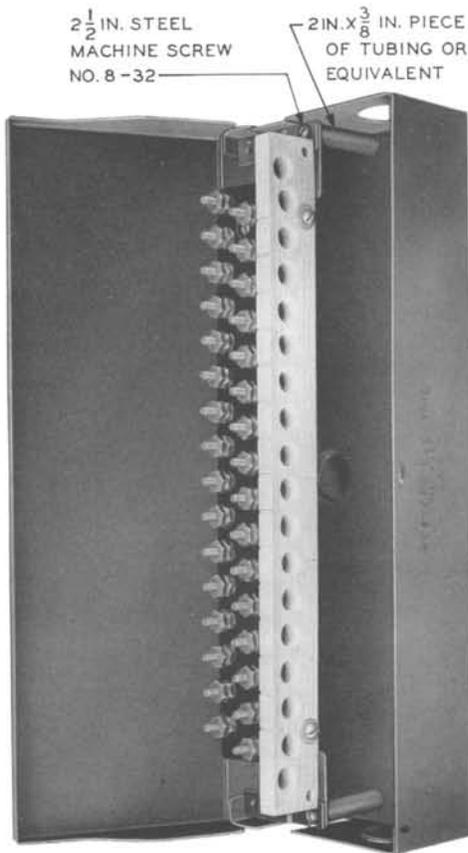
TEMPORARY MOUNTING OF ADAPTER
